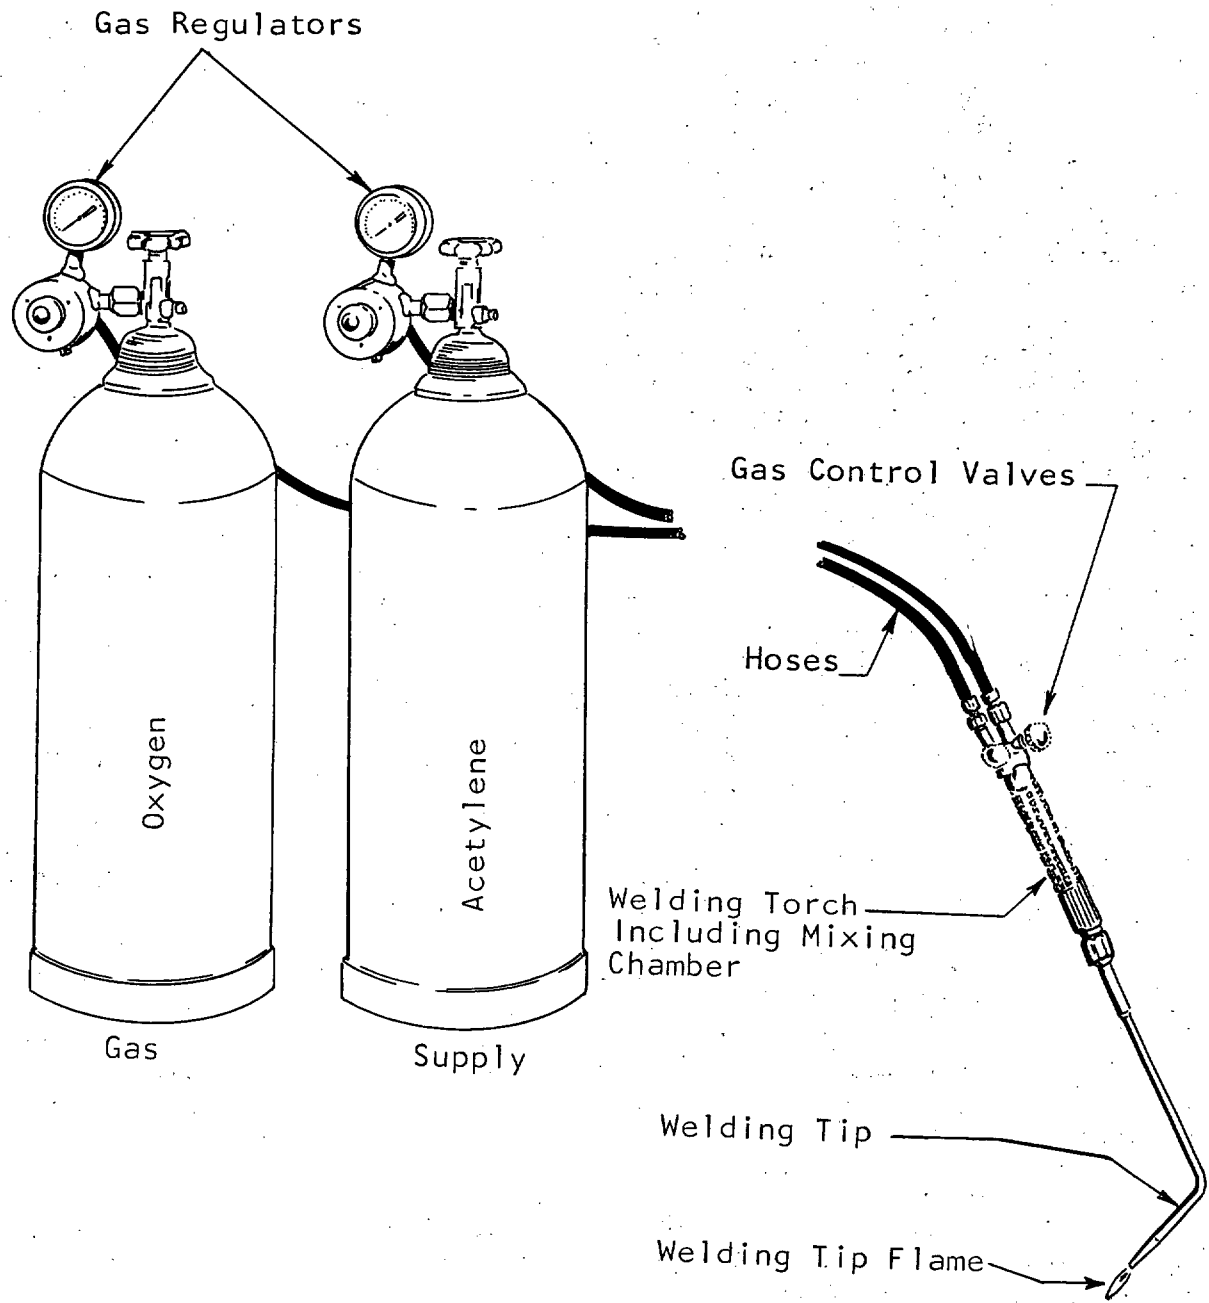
Oxyacetylene Welding Equipment
